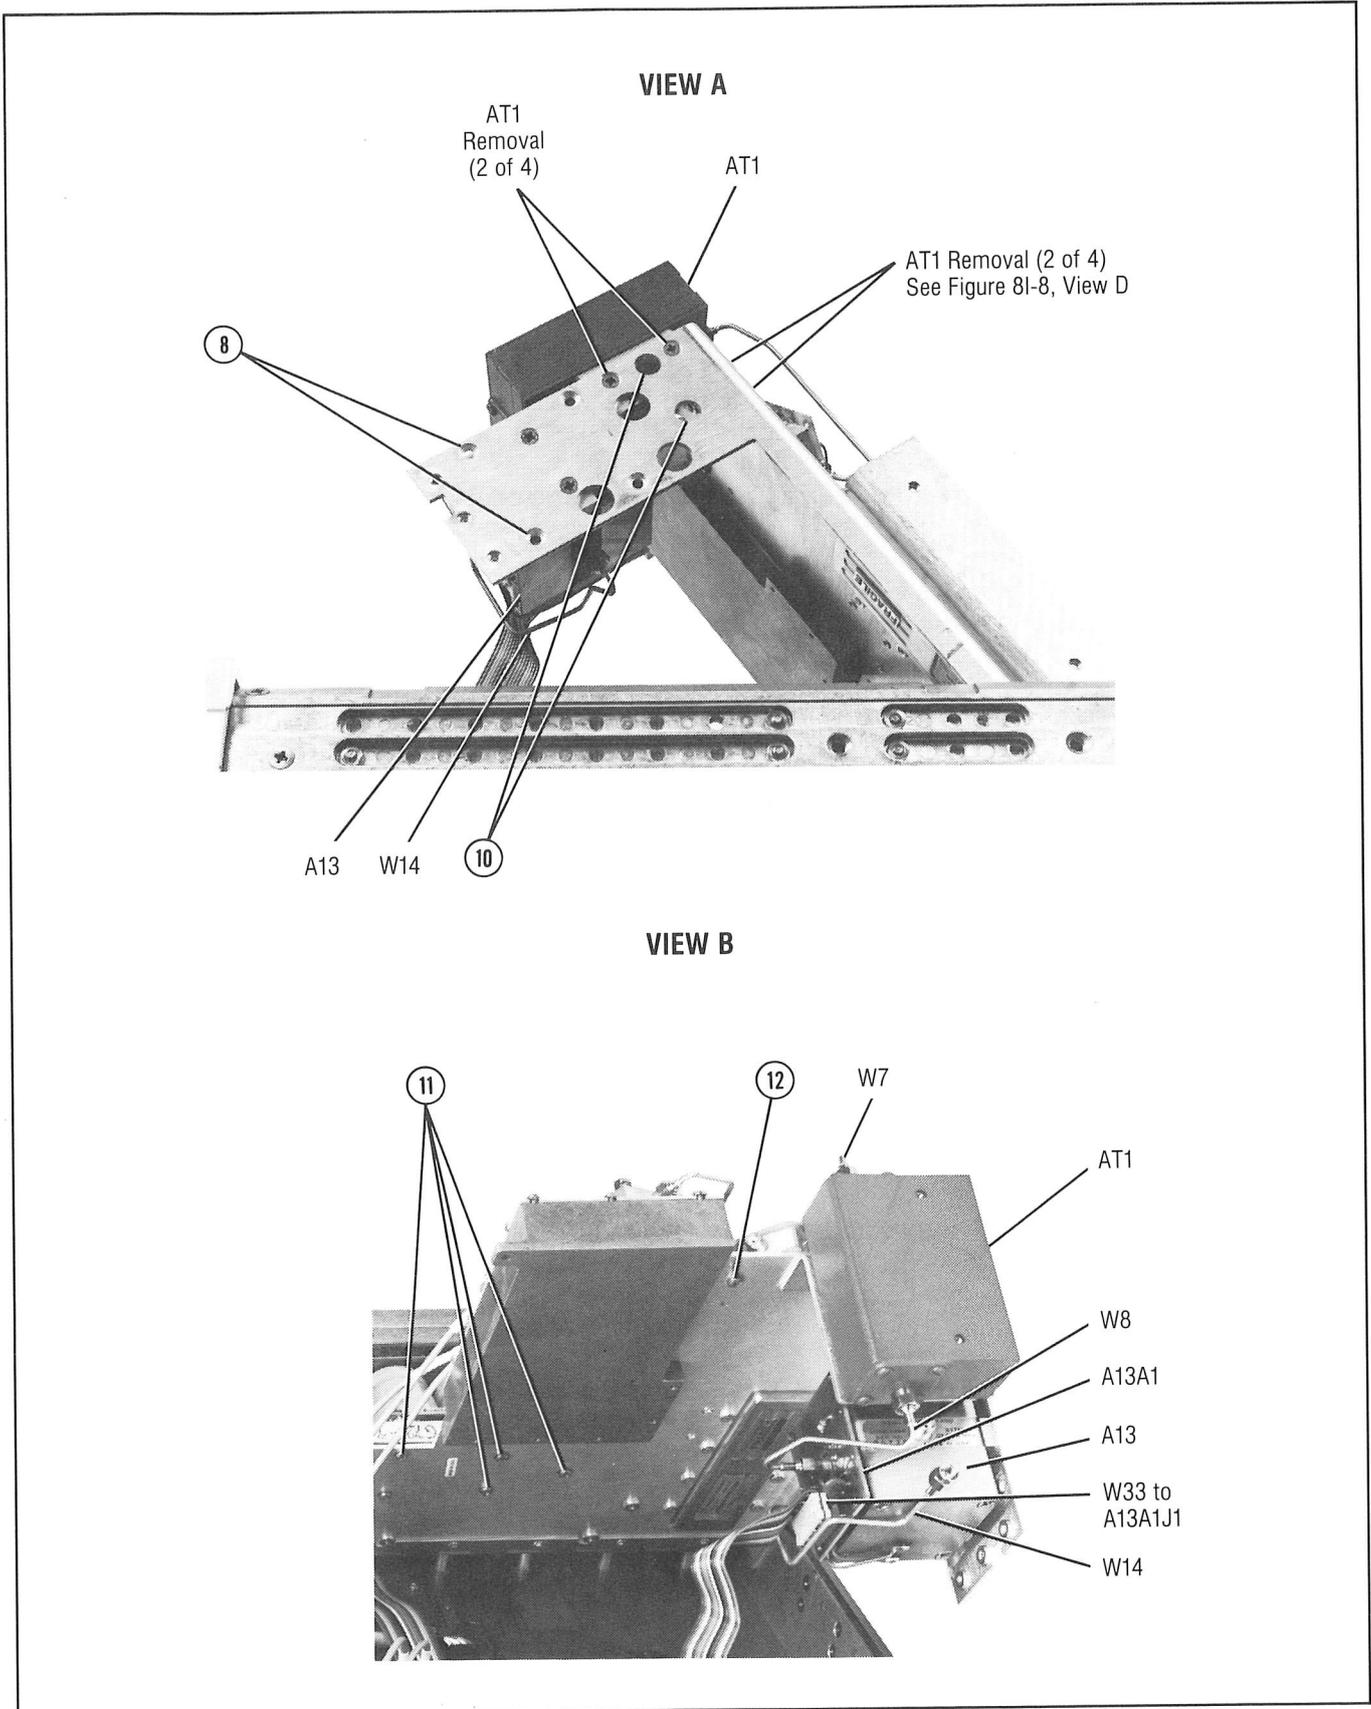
I-9. A13, A13A1, A16, A18, and AT1, Assemblies, Cables, and Mounting Hardware Location
